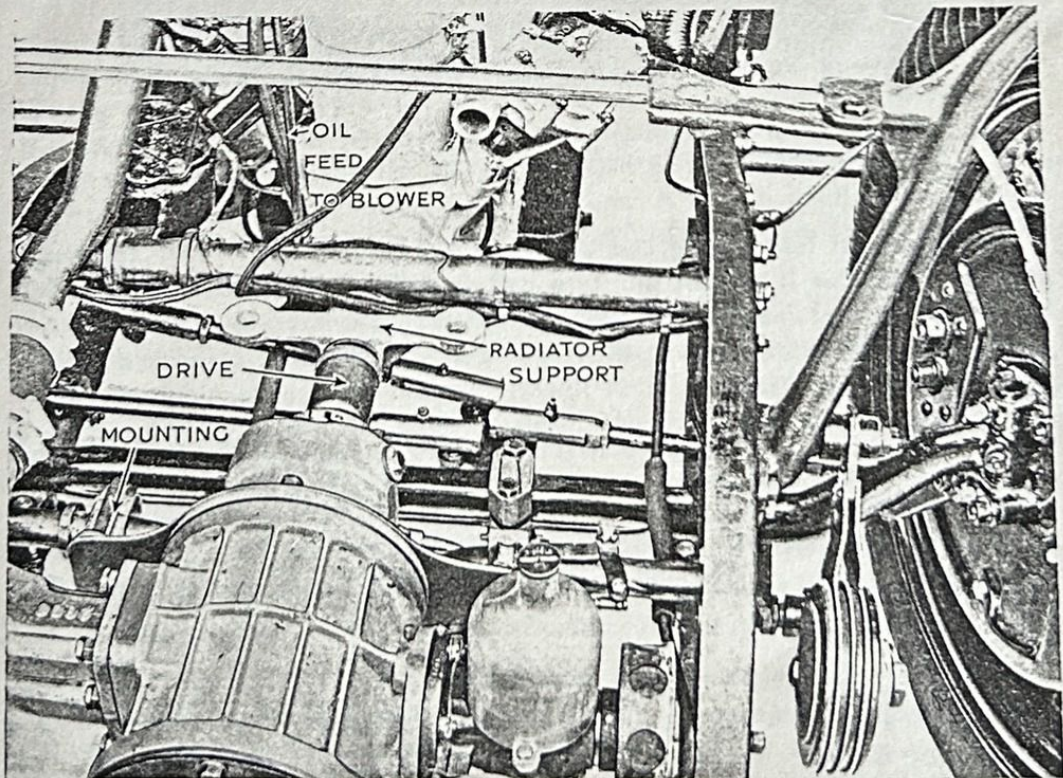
Illustration No. 5.—Plan view of supercharger, showing drive and mounting and position of radiator support.
